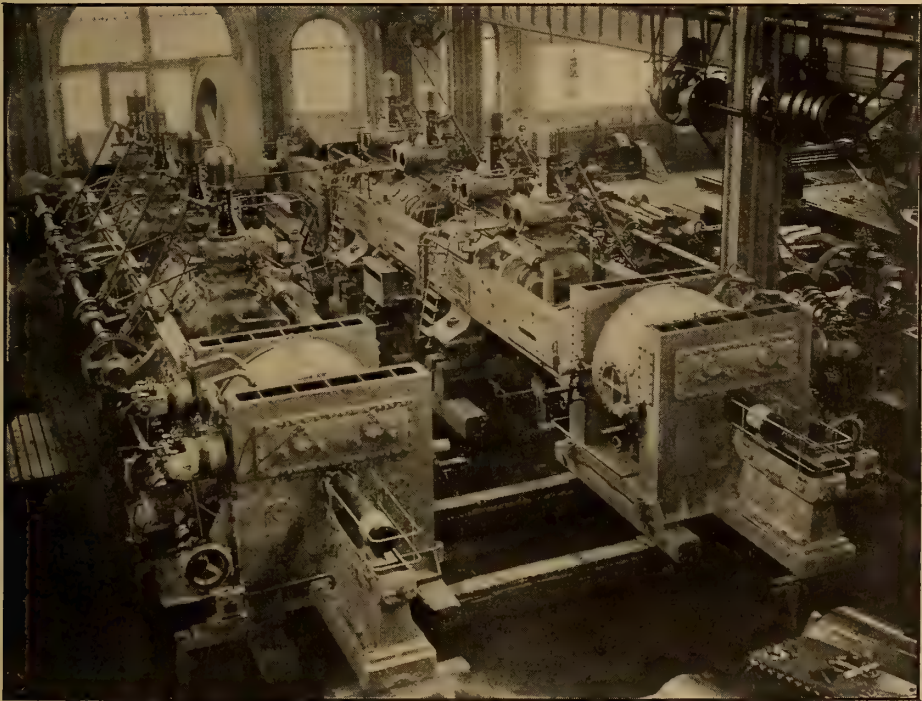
TWIN-TANDEM COCKERILL BLOWING ENGINE, BY THE JOHN COCKERILL COMPANY
